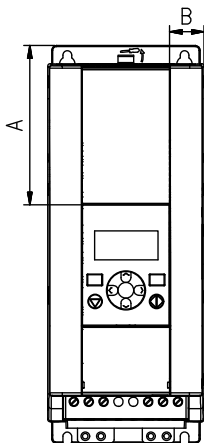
Vacon10 dimensions, MI2 - 3 Display Location
